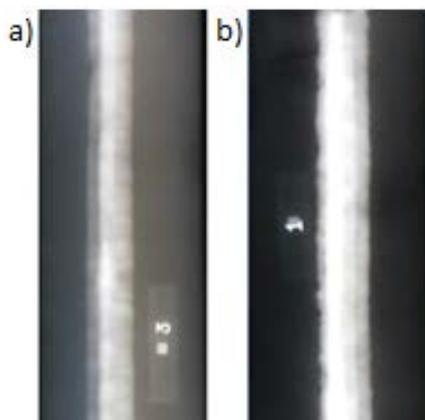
Radiographic photograph of welded joints, where a) welded plate with no defects in the weld (2202) and b) welded plate with defect type "lack of side fusion"
